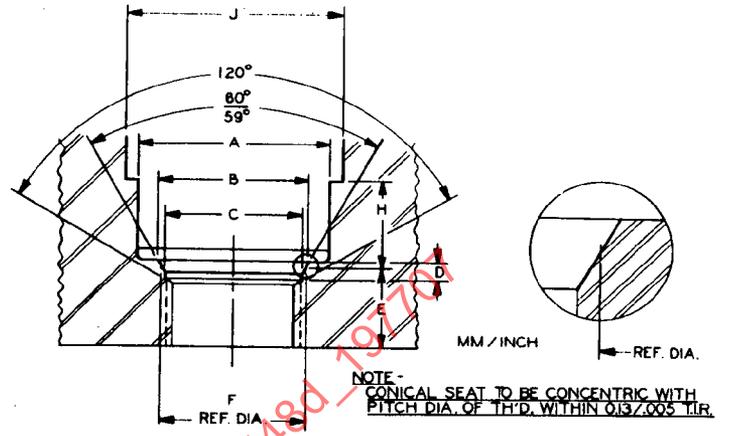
HEAD COUNTERBORE—CONICAL SEAT (SPECIAL LONG REACH) (SEE TABLE 4)
